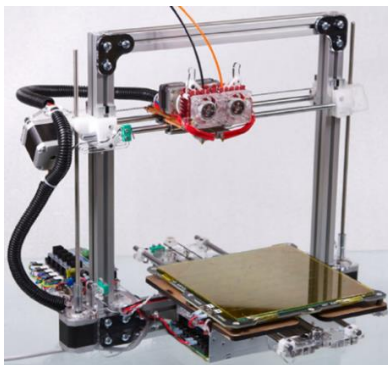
A typical cartesian 3D printer (a Deezmaker Bukobot Duo)
